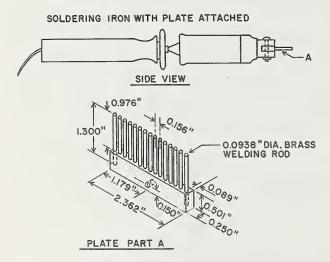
Details of welding pins, which are attached to and heated by soldering iron, for heat-welding the plastic strips together.
